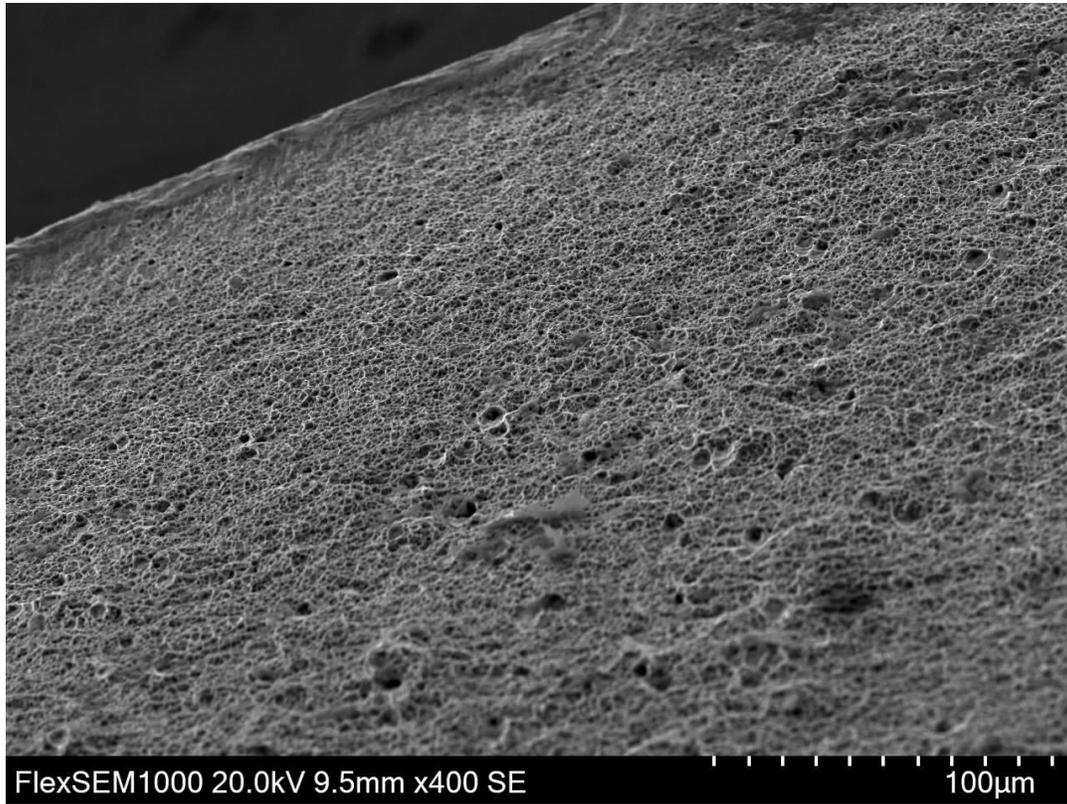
DIMPLES OBSERVED ON THE FINAL FRACTURE AREA, BOLT C2
